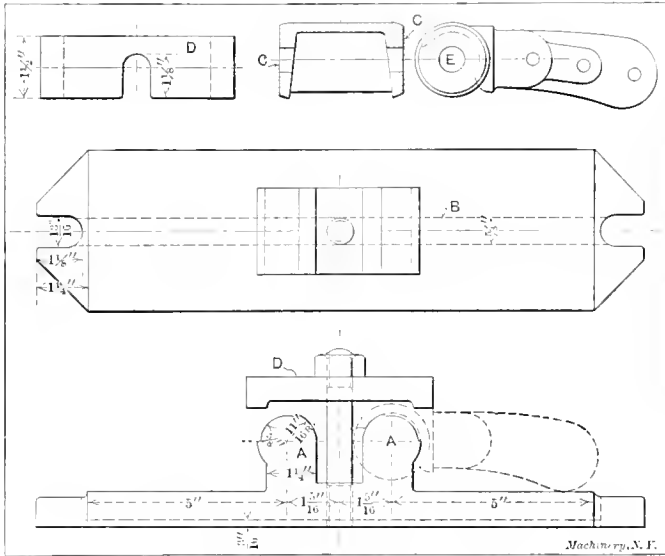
Fixture for Milling Sides *C* of Spring-hanger
